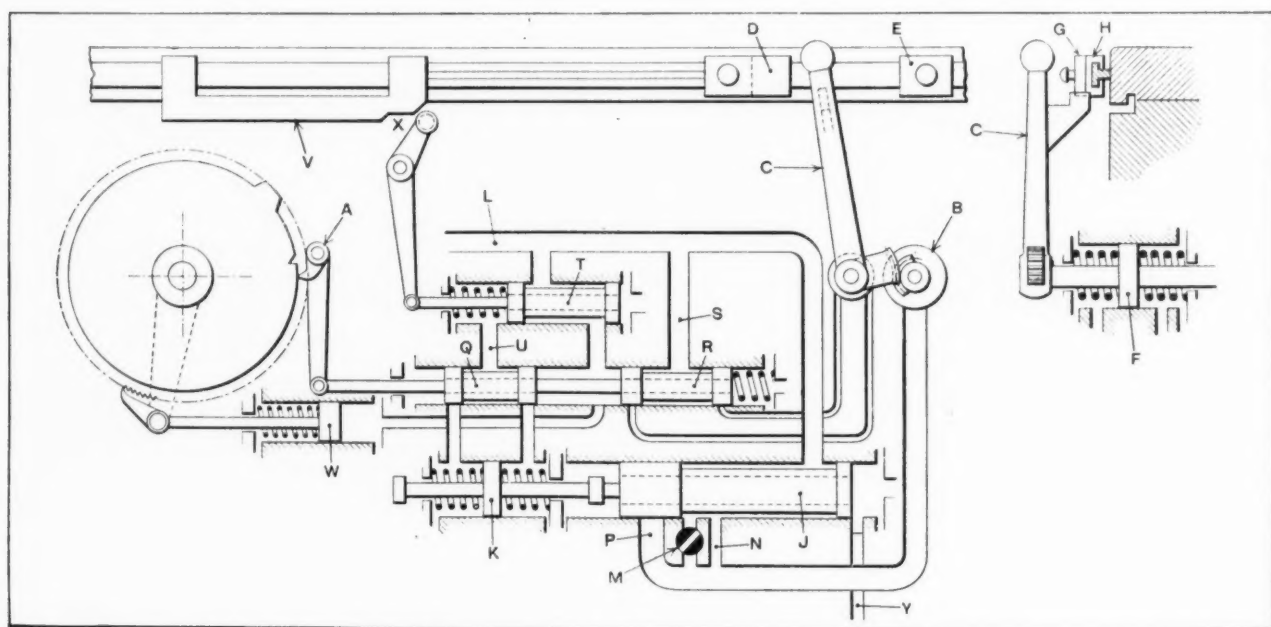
Hydraulic Control System for Internal Grinding Machine
